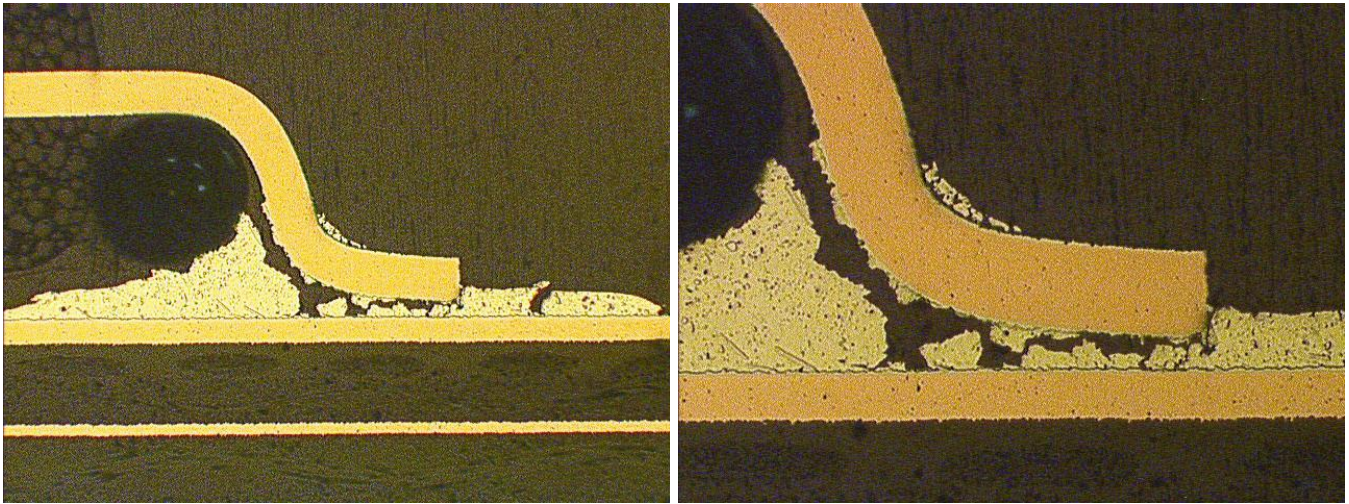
TQFP-144 Solder Joints, Board 41, Component U20, SAC305/SnPb Dipped, Failed @ 3541 Cycles
